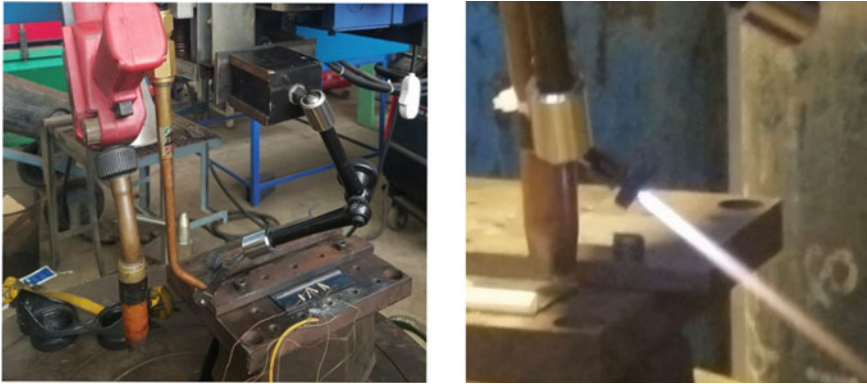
Tandem torch arrangement with gas acetylene flame at the trailing end of GMA welding torch
